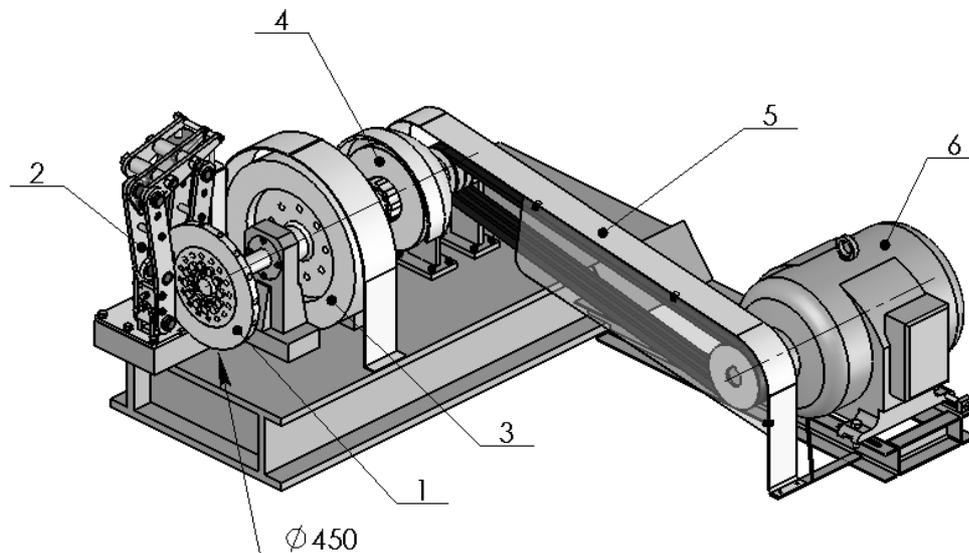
Inertia stand: 1 – disc; 2 – disc brake DBE-1; 3 – flywheel;
